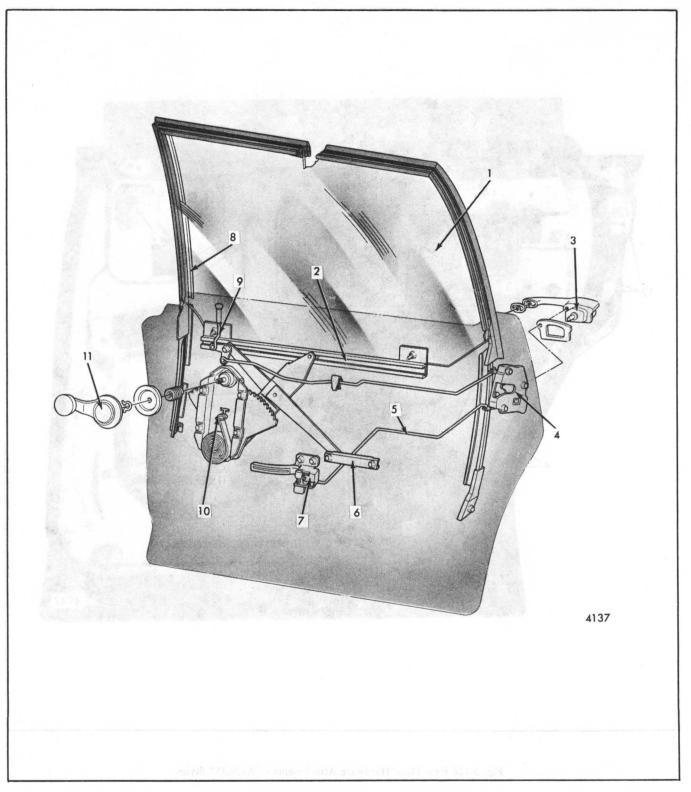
Rear Door Hardware - "B-35,45" Styles
